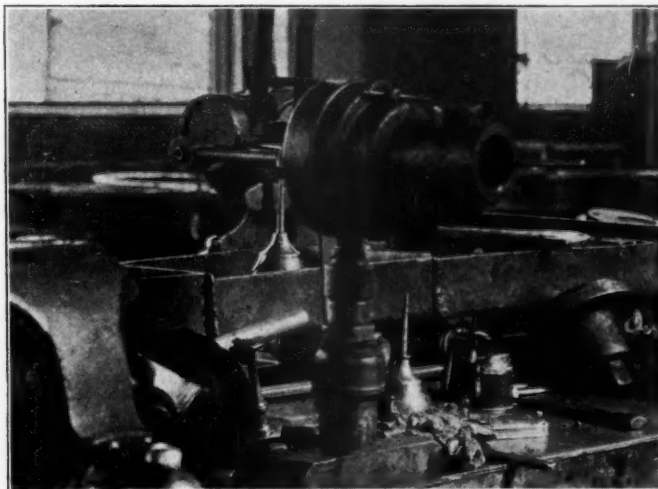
View Showing Thermit Welds and Front Deck Casting Ready to Be Applied
